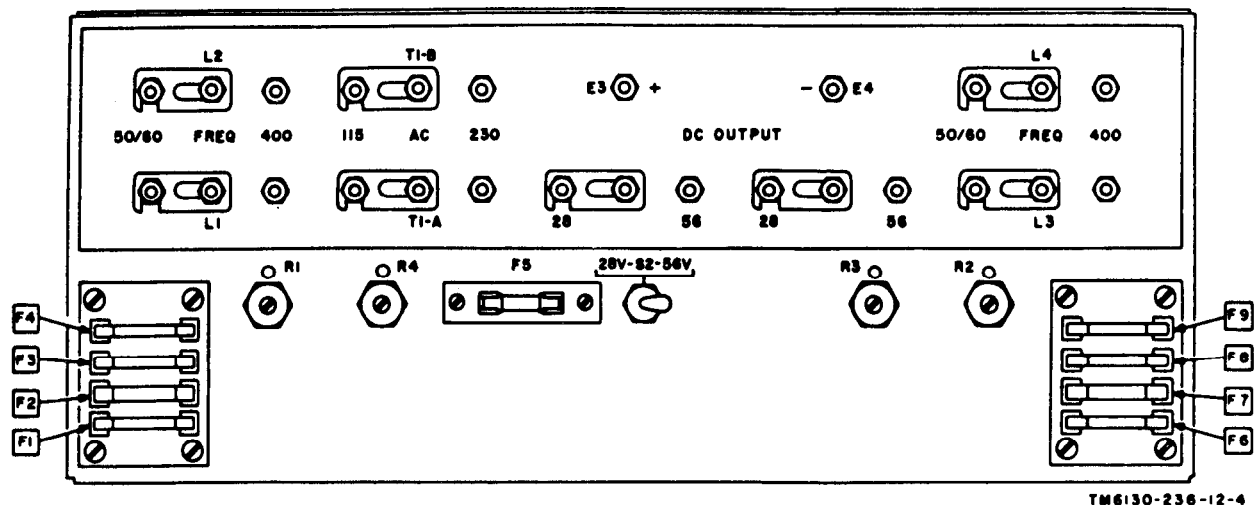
Charger, Battery PP-1451/G, front chassis assembly panel.
